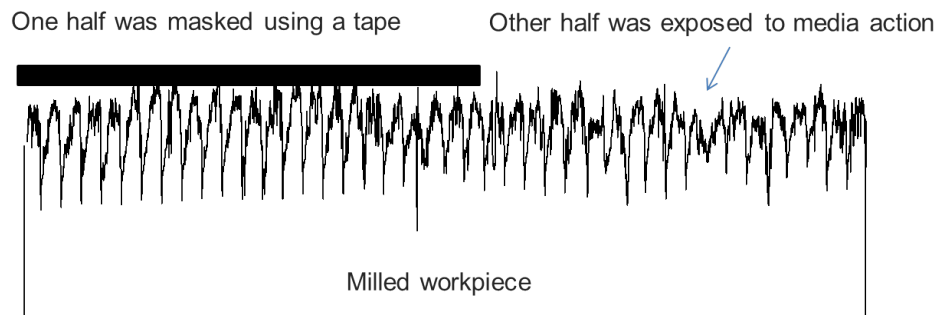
Uniform peaks and valleys formed on milled workpiece
